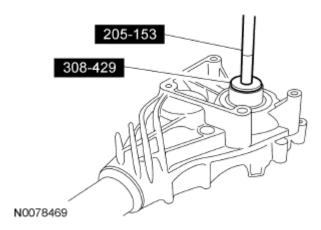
Installing Intermediate Shaft Seal Courtesy of FORD MOTOR CO.
